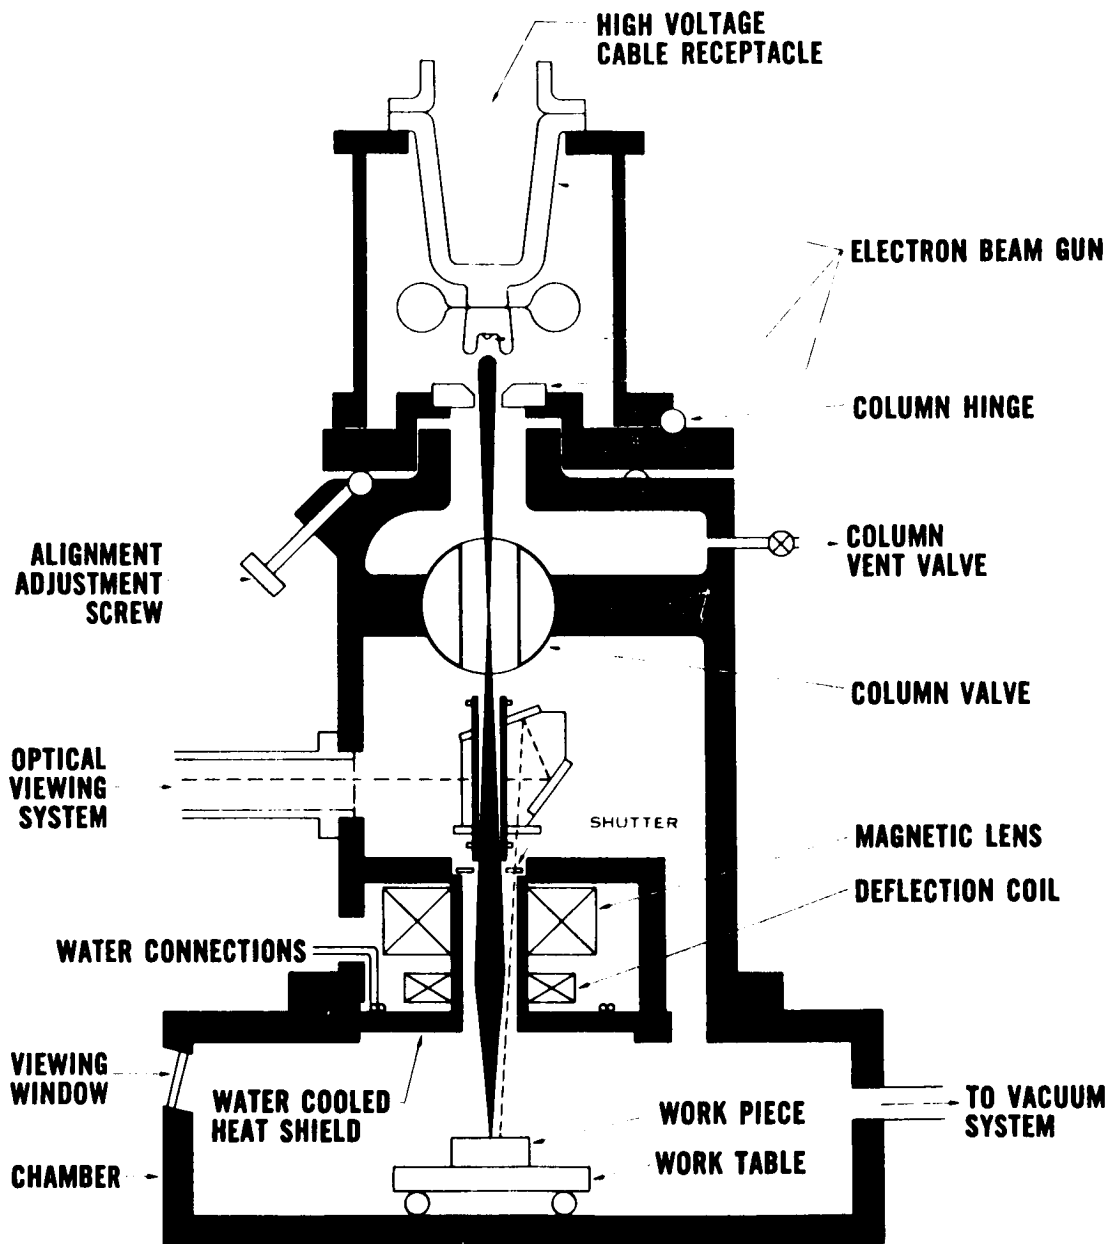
ELECTRON-BEAM-WELDING MACHINE (REF. 51)
